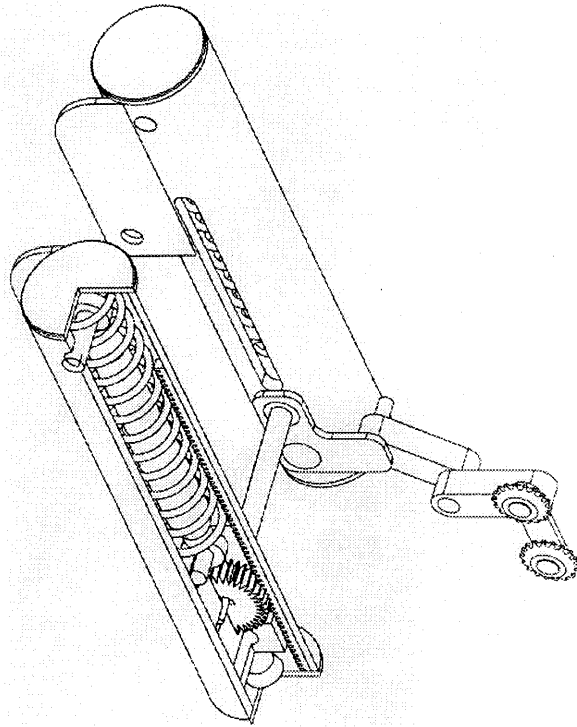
A cutaway view of the rear wheel retrofittable suspension system, as modeled and rendered in Pro/ENGINEER.
